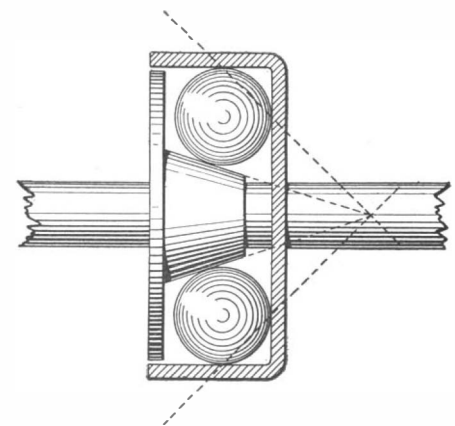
SECTION THROUGH 6-BALL BEARING, SHOWING METHOD OF MEASURING ANGLE OF CONE.
